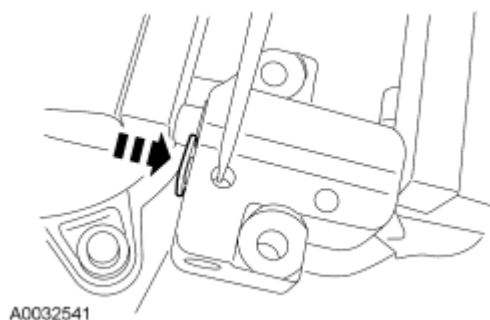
Pushing Ratchet Arm Back Into Tensioner Housing
